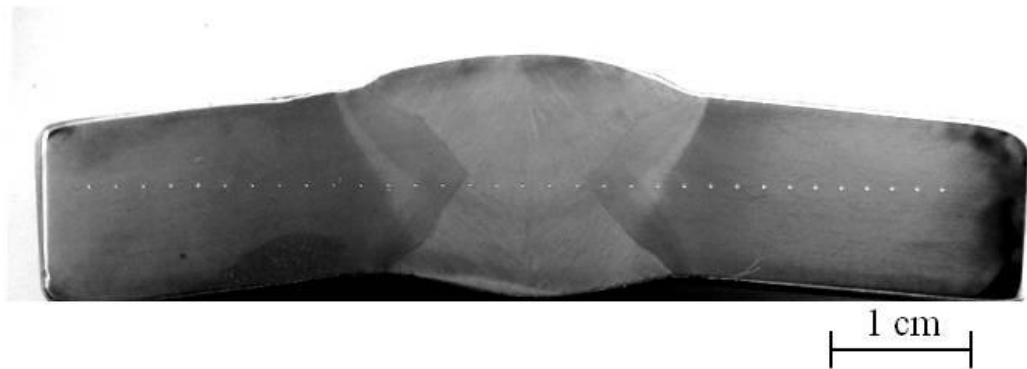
Seam-weld and HAZ of a grade X80 pipeline steel
